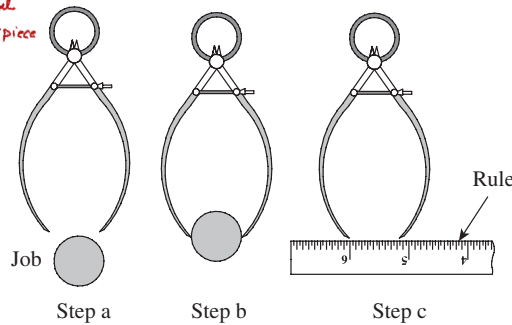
Calliper being used to transfer a dimension from a job to a rule
